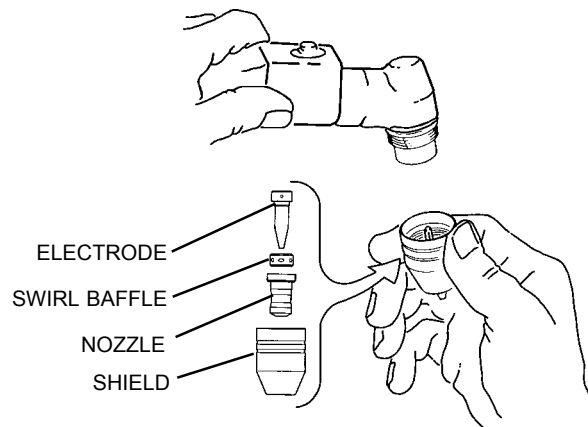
Assembly of PT-27 Torch Front End Parts
